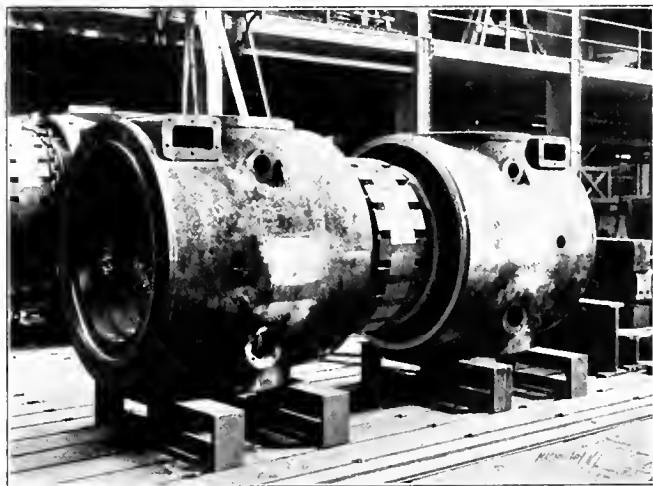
Partly Finished Cylinder Casting, the Two Halves are shrunk together by the Links shown.
